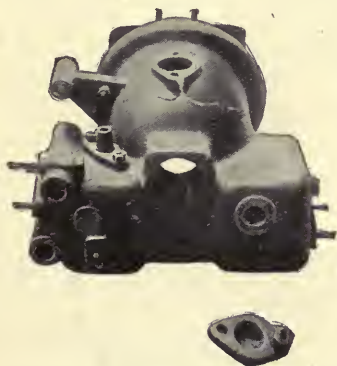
Damaged motor cylinder only repairable by autogenous welding.
